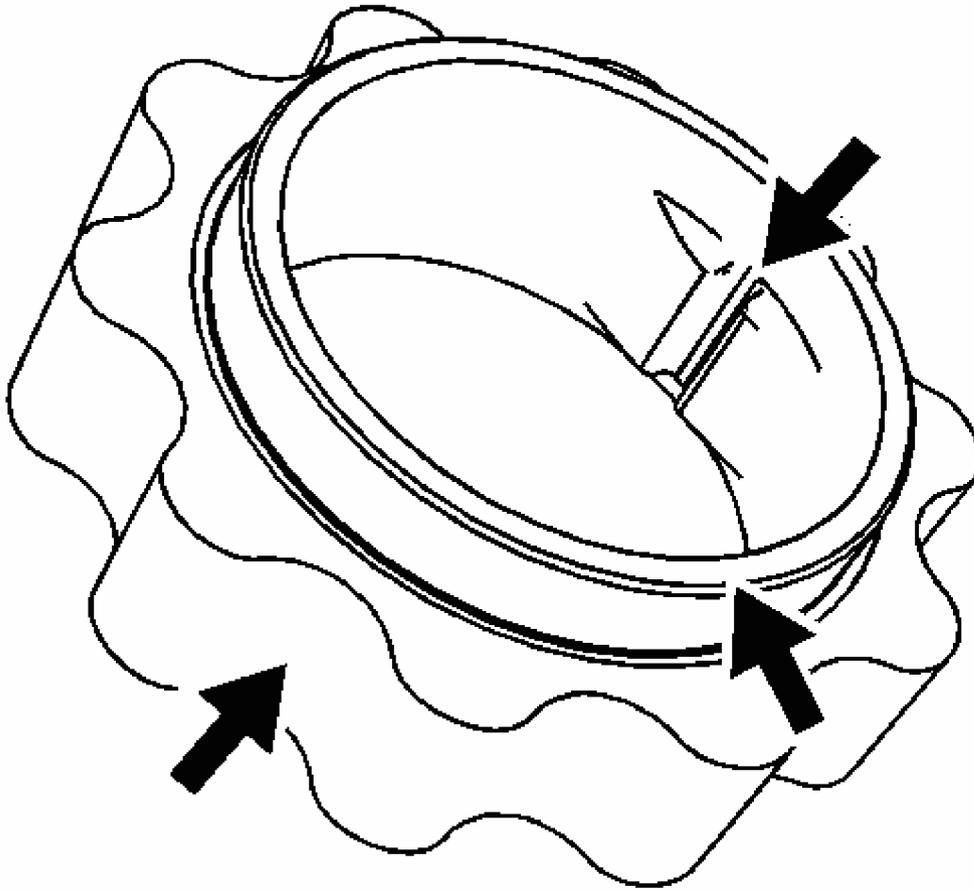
Locating Inspection Areas On Inner Drive Gear
